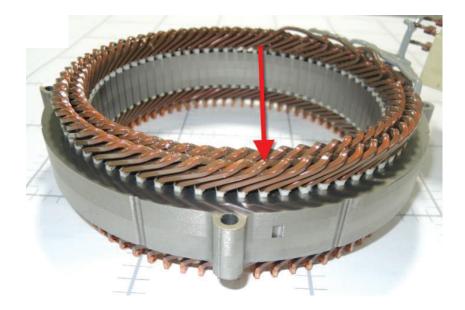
Chevy Volt Stator Stack Laser-Welded Seams
